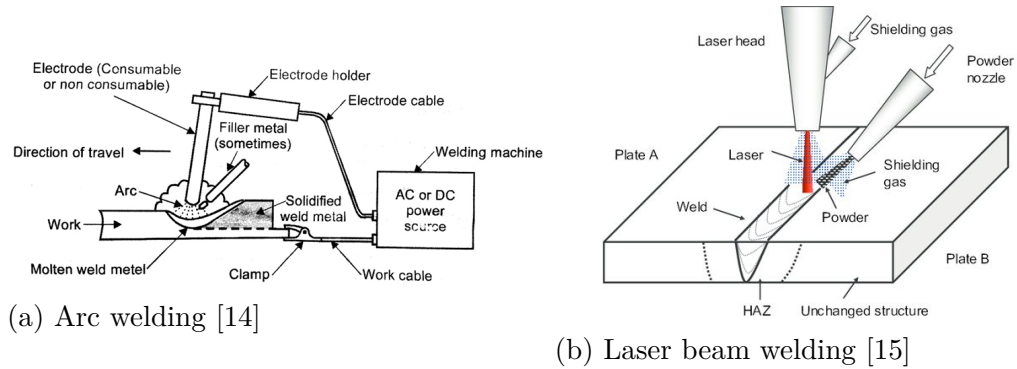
Schemes of two fusion welding methods. Arc welding consists of an electric arc established to melt the surface of substrate material, usually in a shielded gas environment. Laser cladding uses the same concept, except that a laser is used to melt the surface of the substrate instead of arc. Addition material can be supplement in the form of a wire, powder or a strip in both arc and laser beam welding.
